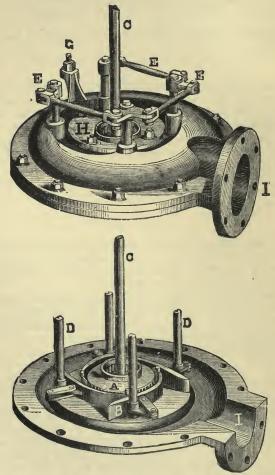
External view and section of a turbine. I, inlet pipe; B, guides; A, movable wheel keyed on the shaft C; B, one of the guide-blades; D, the bell-cranks and shafts connecting the guide-blades with the outside bell-cranks and coupling-rods, E; H, wheel-cover.
